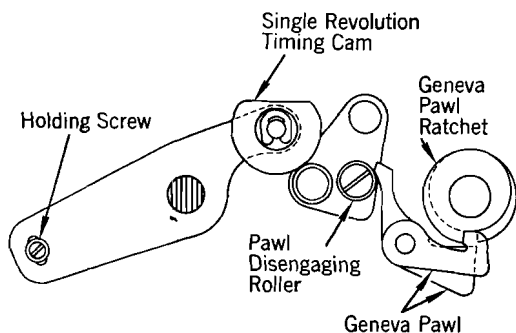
Single Revolution Timing Cam and Bracket Adjustment
